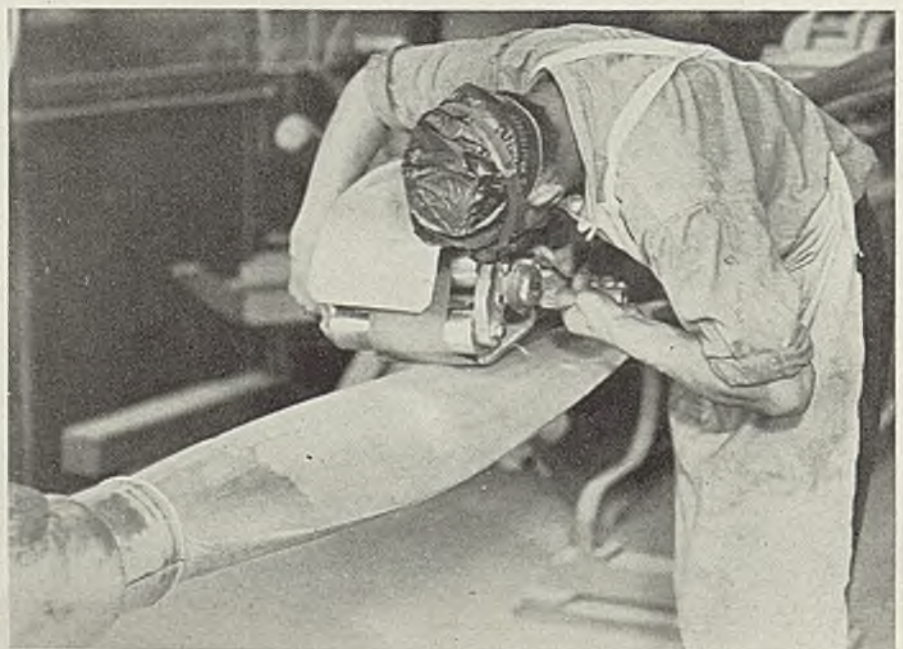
Belt sander mounted on counterbalanced arm permits operator to reach all surfaces of propeller blade without fatigue. Polishing head can be swung radially as well as traversed across work
